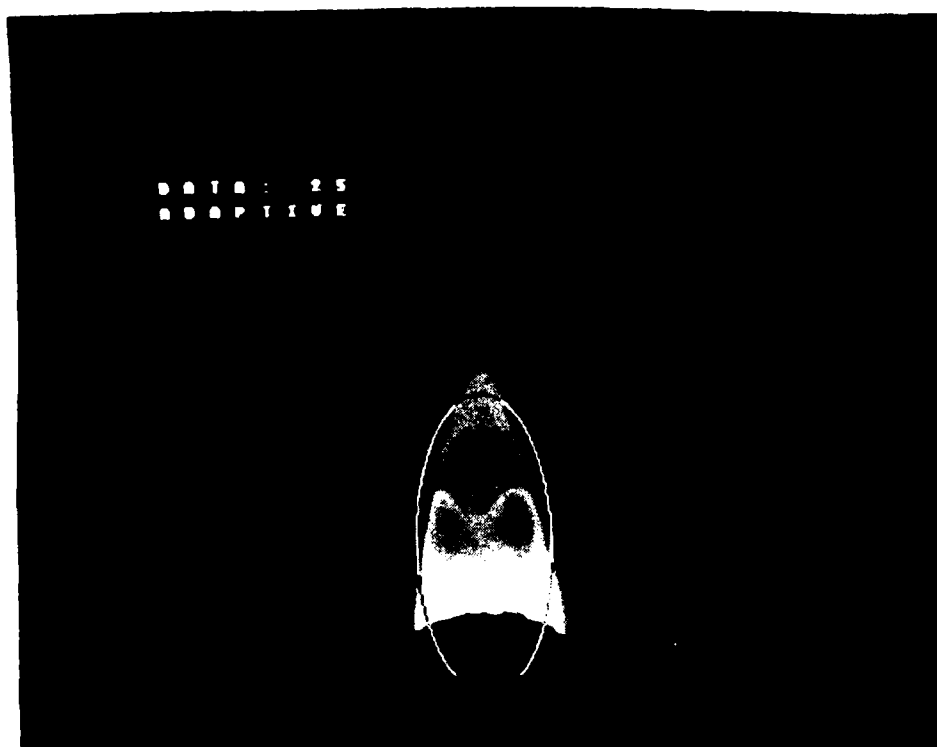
Image of weld puddle showing estimated ellipse.
